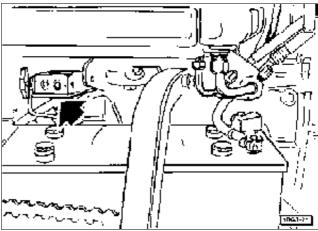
Disconnect the front and rear brake oil lines from the Separate Brakes valve, located beneath the cab on the right hand side.
